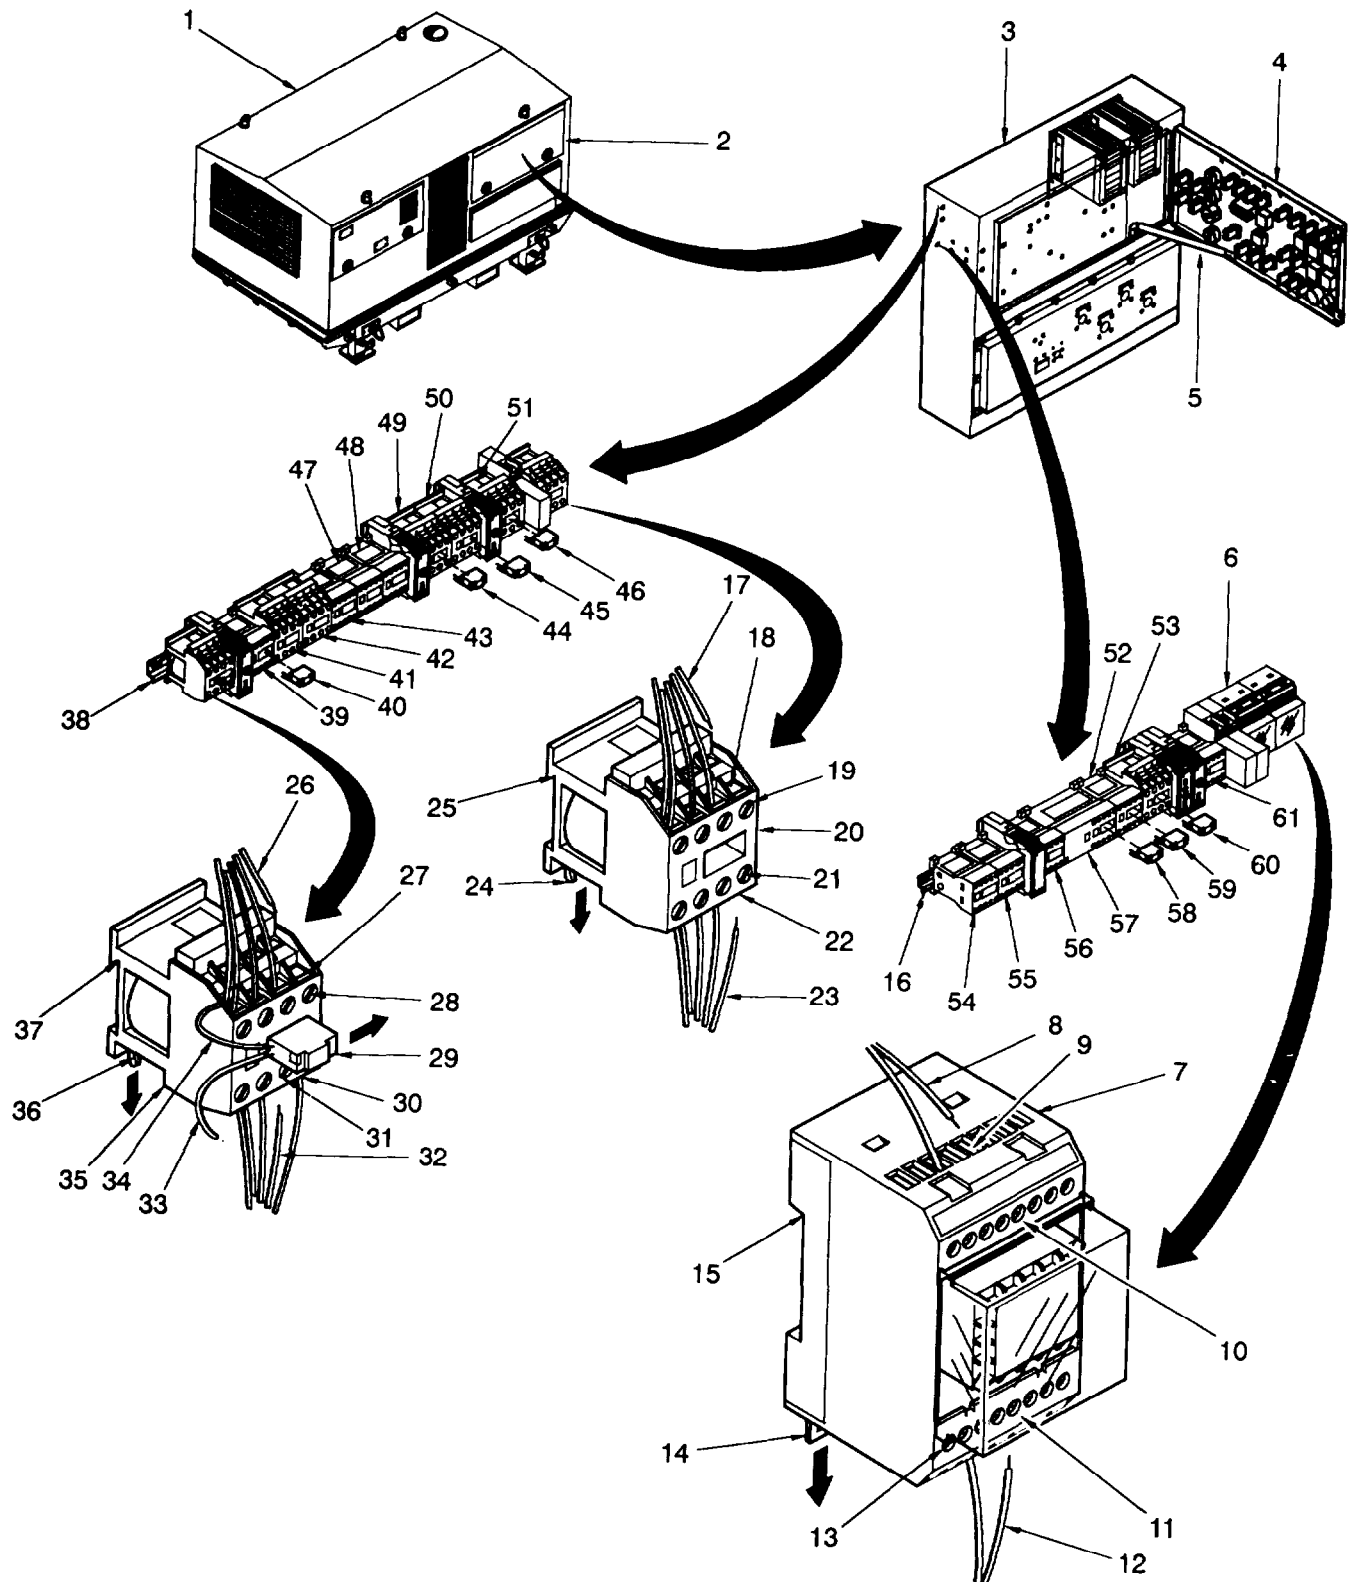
Control Cabinet Assembly, Auxiliary Contactor with Semiconductor, Auxiliary Contactor, Transformer, Maintenance.
